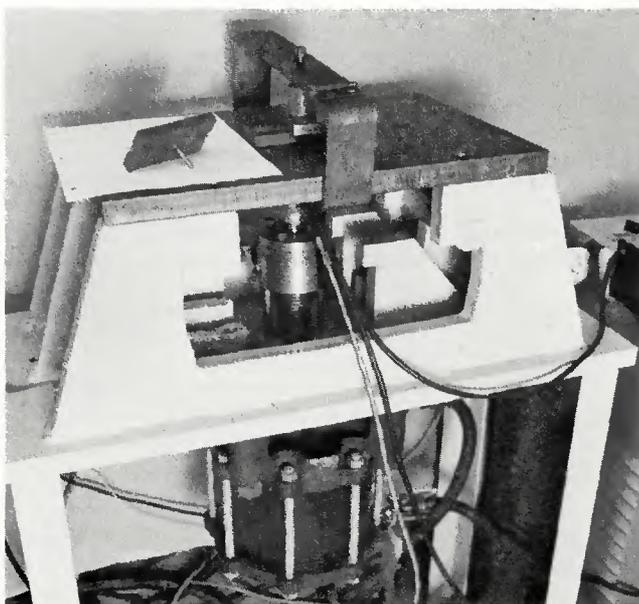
Implant machine showing an implant specimen on the left in addition to the specimen loaded under the restraining clamp
